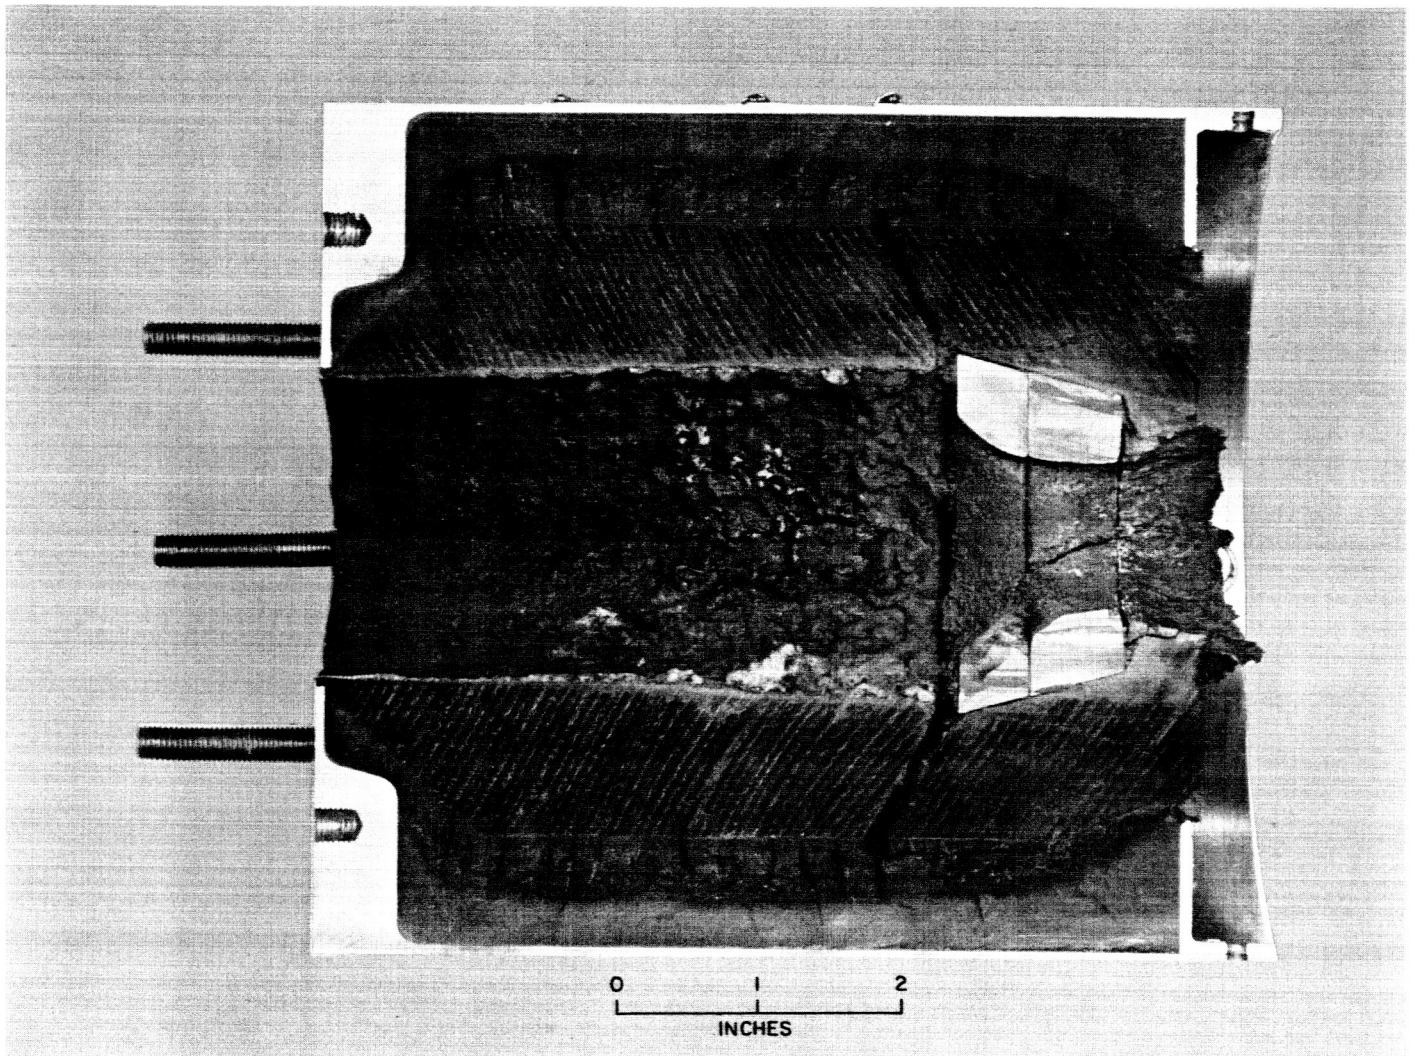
Cross section of AVCO ablative chamber after firing test, showing the cracked nozzle-throat insert and char depth
